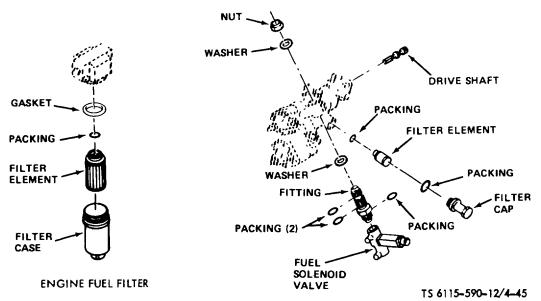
Engine Fuel Filter, Fuel Solenoid Valve and Fuel Control Unit Filter Replacement.
